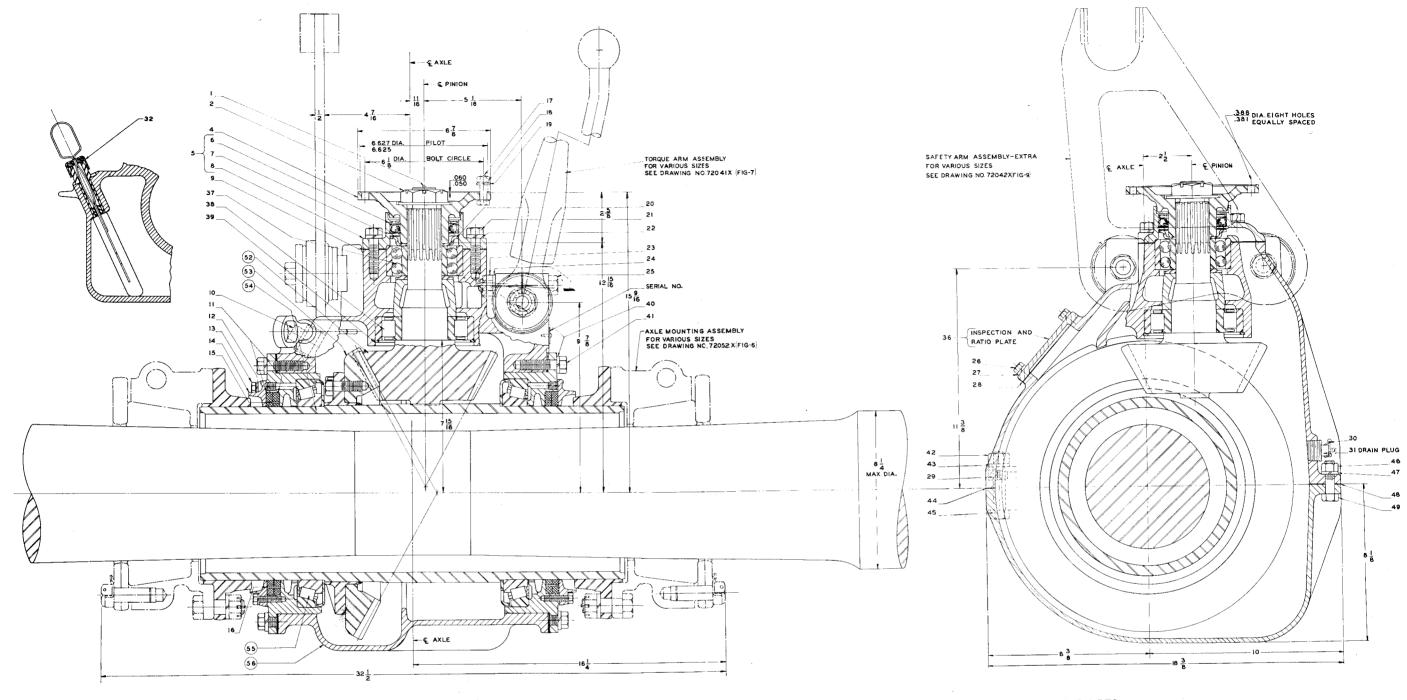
70001 GEAR UNIT—MODEL 6-1
